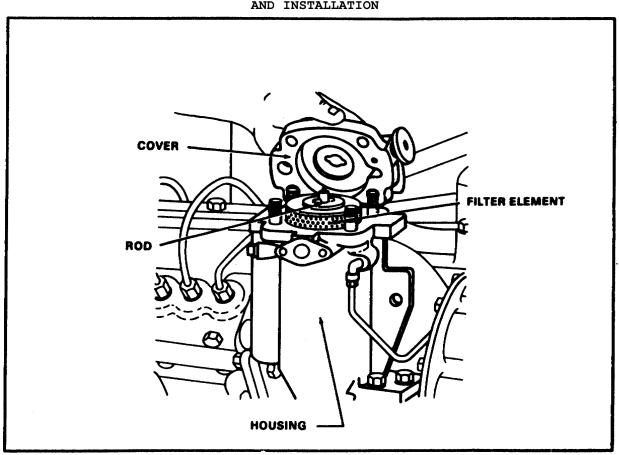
FUEL FILTER ELEMENT REMOVAL AND INSTALLATION
